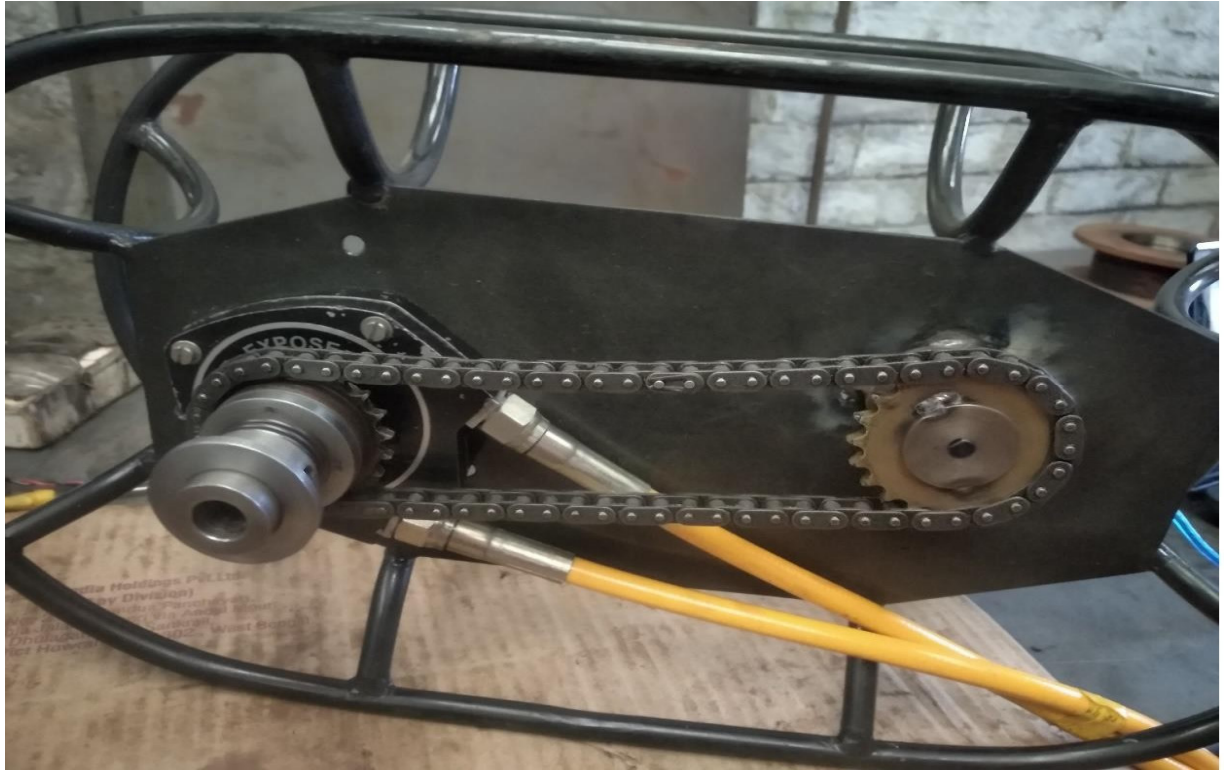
Chain & Sprocket Assembly with Associated Components
